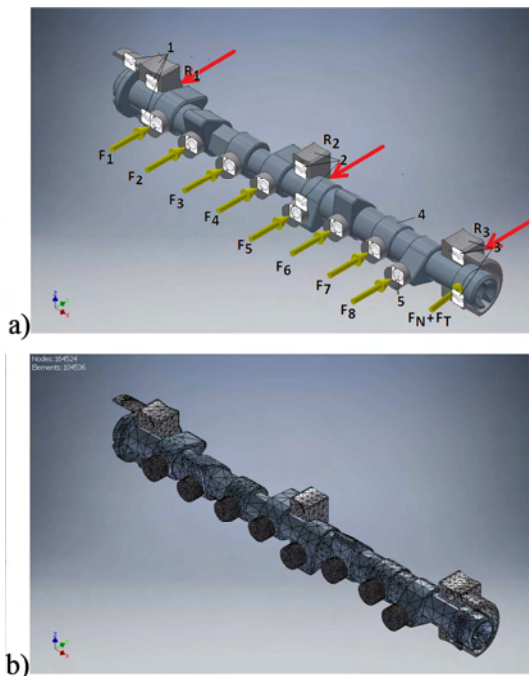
The model of the tappets-camshaft-bearings assembly, b) The finite element grid. 1, 2, 3 – bearing covers with fixed surfaces located on the plane containing camshaft bearings axes, 4 – cam shaft, 5 – tappet with fixed axis of rotation,  $F_1, F_2, F_3, F_4, F_5, F_6, F_7, F_8$  – forces loading the consecutive tappets mating with the shaft cams 4,  $F_N$  – force from the toothed belt tension,  $F_T$  – force resulted from the part of the drive torque acting on the toothed pulley mounted on the camshaft,  $R_1, R_2, R_3$  – reactions in bearings 1, 2, 3
